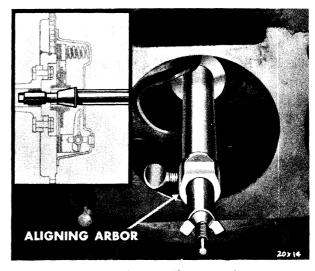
Clutch Disc Aligning Arbor (Tool C-360) Installed
